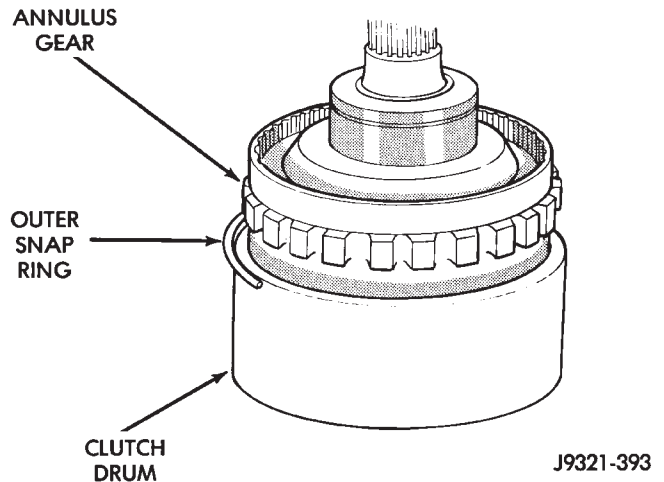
Clutch Drum And Outer Retaining Ring Installation
